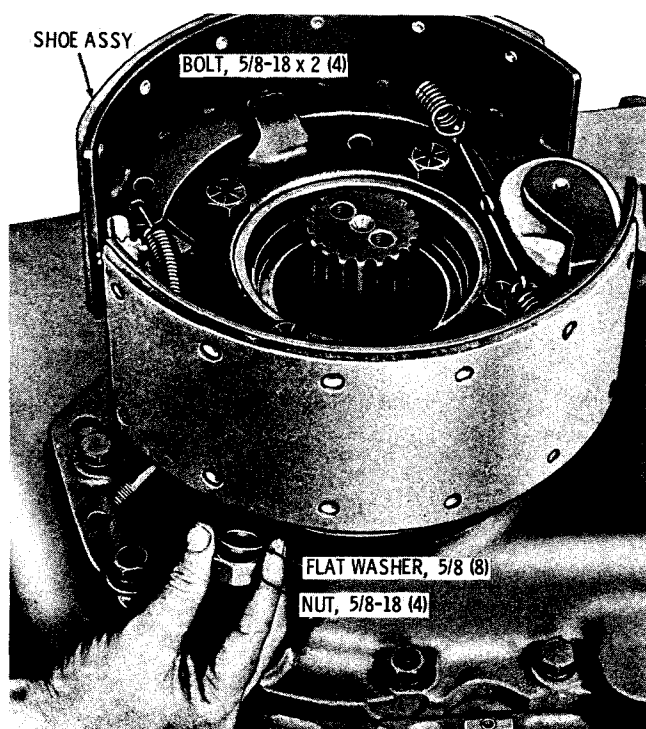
Installing parking brake mounting bolt nuts S1761
